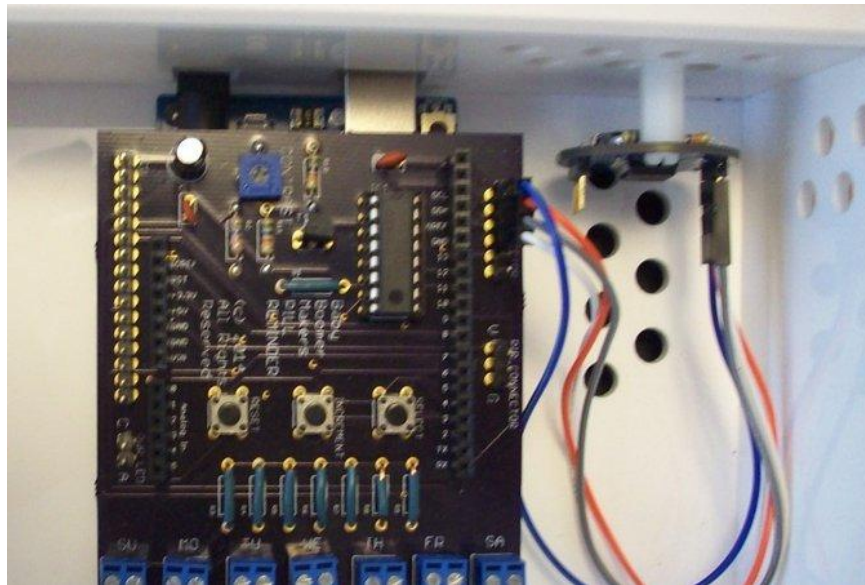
Chronodot RTC Mounted and Wired to Shield Board.
